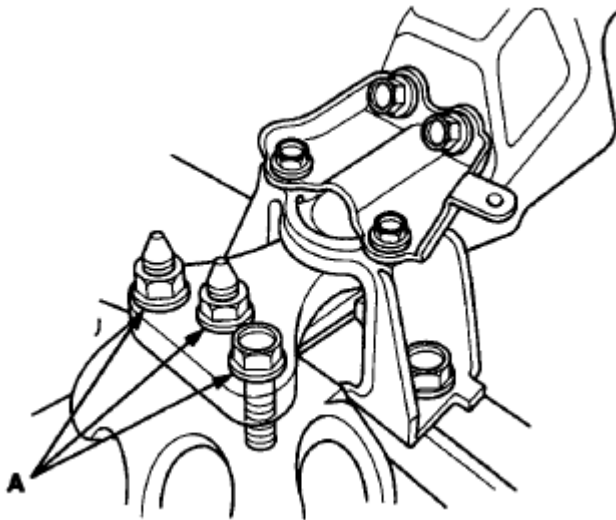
Identifying Transmission Mounting Bolt, Nuts And Ground Cable
